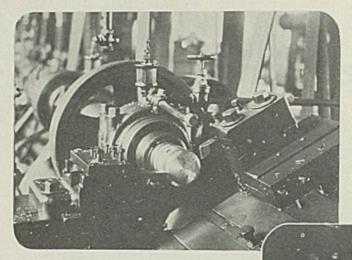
(left)-Finishing a piston on an automatic lathe. Body is turned, end faced and ring grooves formed. Fig. 9 (below) — Diamond boring operation on aluminum alloy piston. Standard drill press with specially designed mechanism for locating and feeding the boring bar are used
